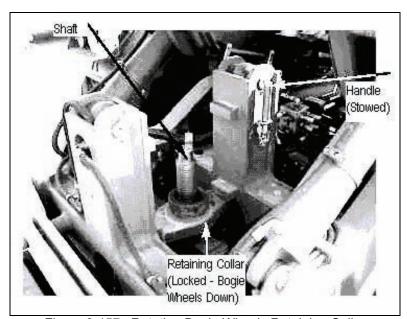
Rotating Bogie Wheels Retaining Collar
